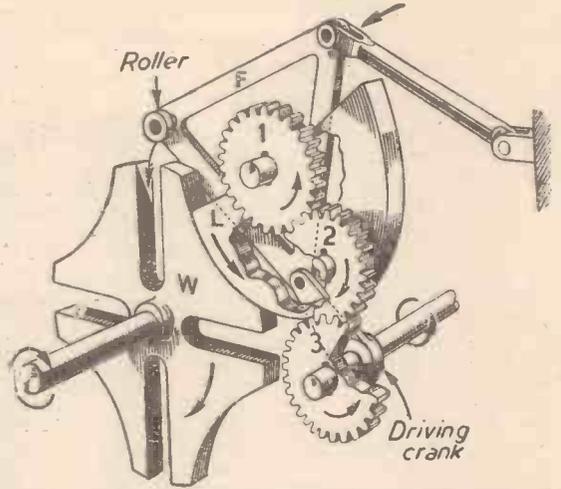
Method of incorporating a locking plate in a modified Geneva mechanism.
